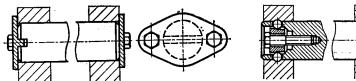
Pivot pin fixed against axial and angular displacements by end plates, one of these having tenon to prevent pin rotation
